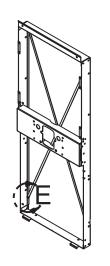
DETAIL A DRYWALL TAB REMOVAL (4 PLACES)
